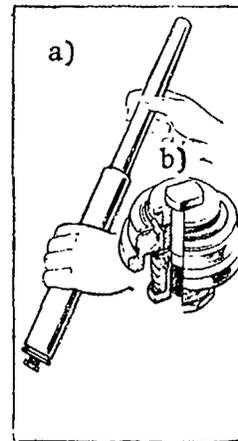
Driving Out Compression Valve: a, removal, b, intact compression valve.
